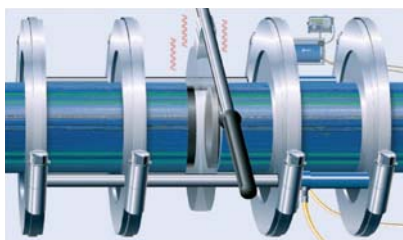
Welding in accordance with DVS 2207, Part 1
